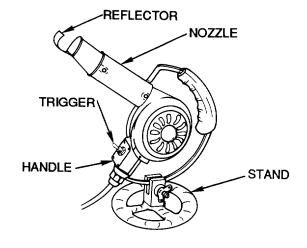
ThermoGun Mark II Heating Tool, CV-5000 with Stand
